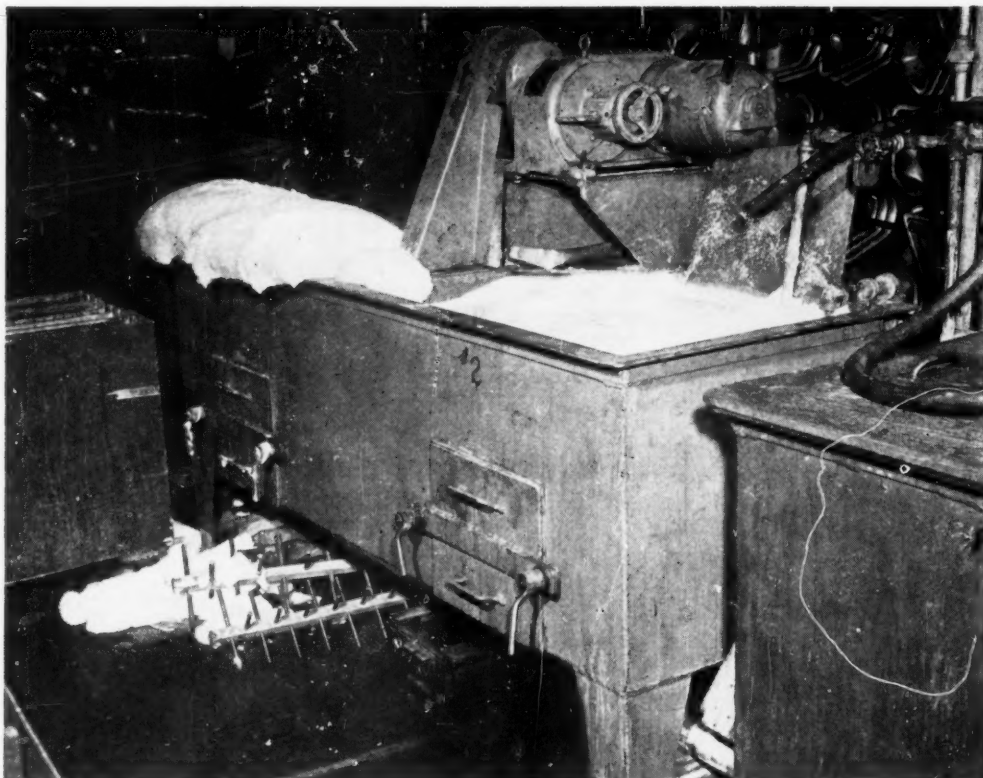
Burring and surface smoothing to fine finishes on precision aircraft parts is now being done in barrel equipment such as pictured at left.
